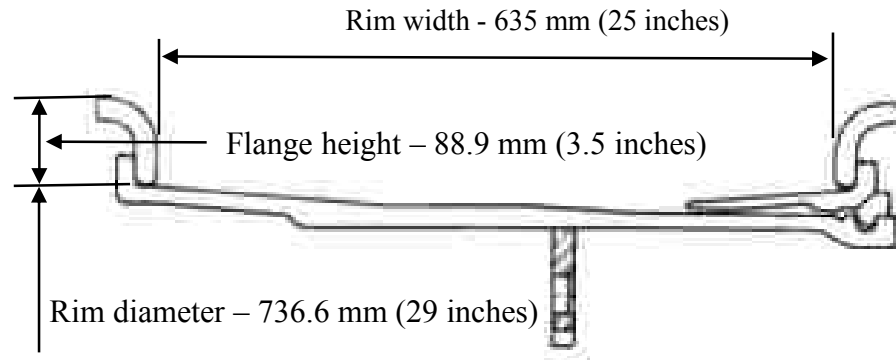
Schematic of a 29-25 five-piece rim, illustrating rim width, flange height, and rim diameter.
